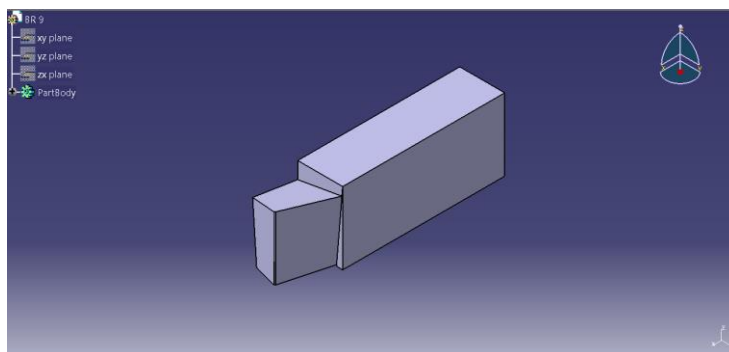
Designed Tool with Back Rake Angle  $9^\circ$
